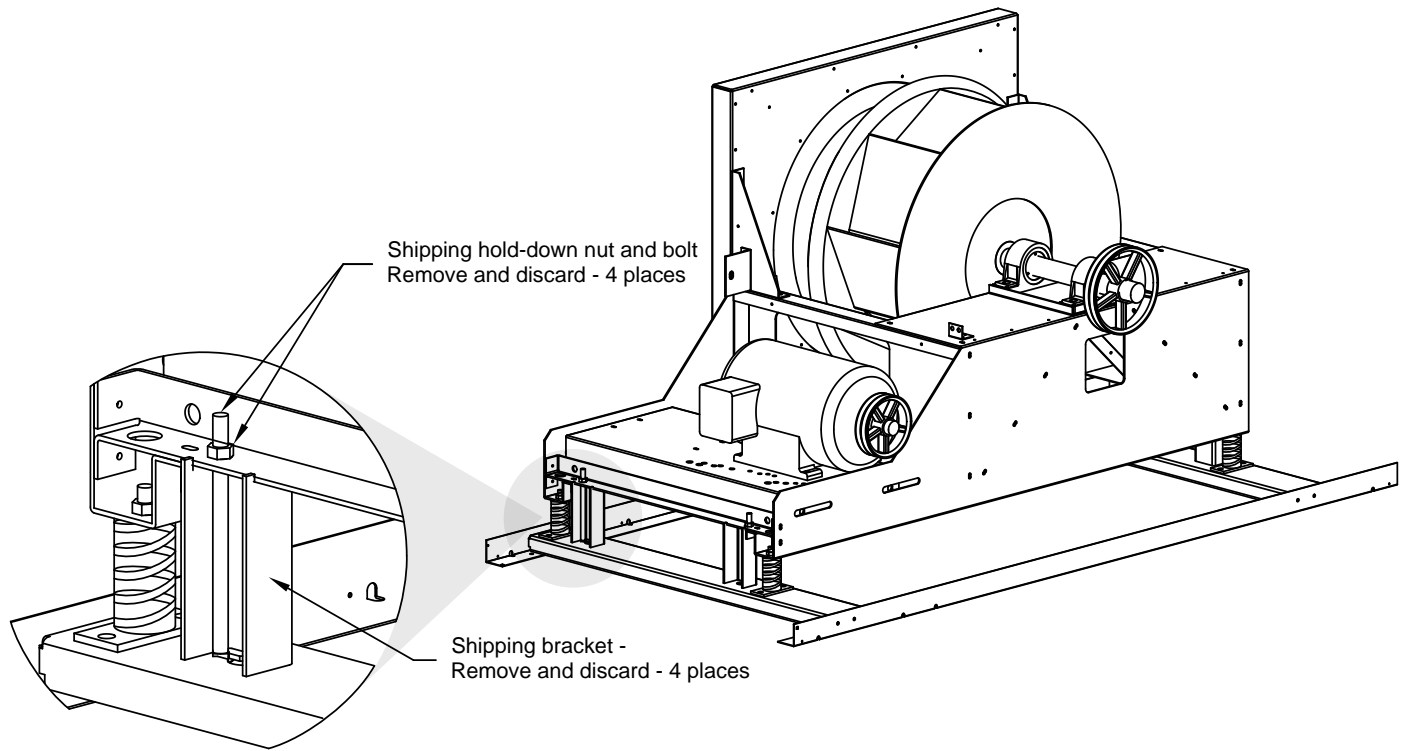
Removing "Motor Behind" Shipping Brackets
